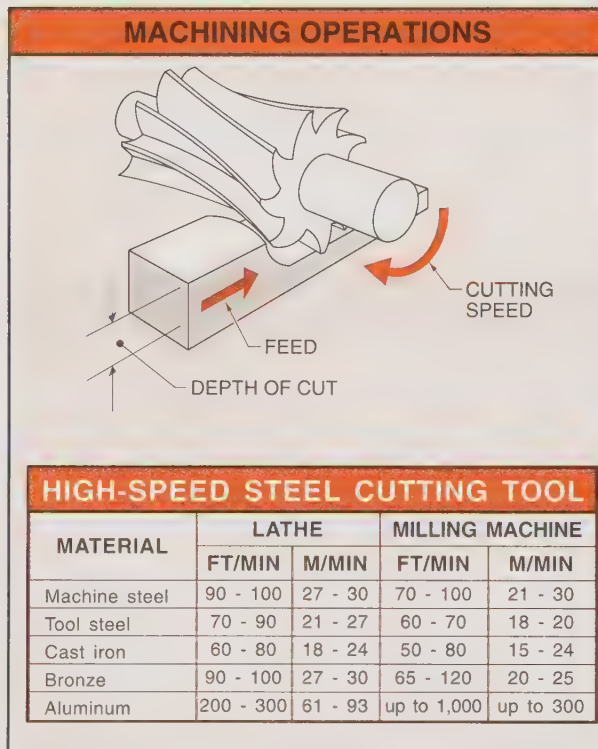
The material machined determines the depth of cut, cutting speed, and feed required.
